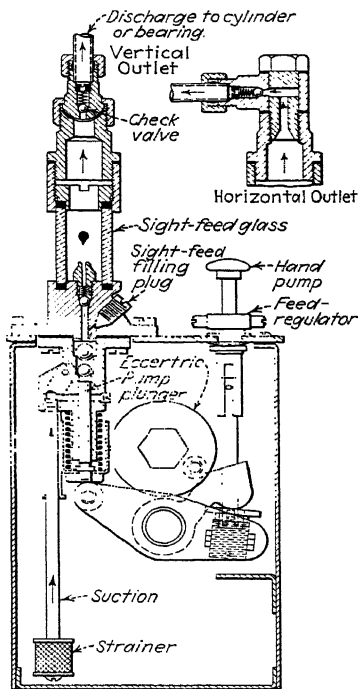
A typical mechanical force-feed lubricator especially designed for Diesel-engine service, but also suitable for other machines.
